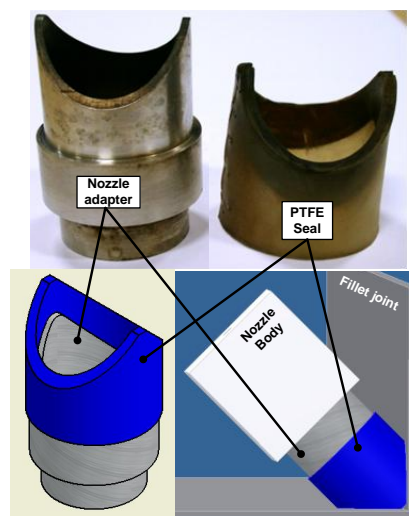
Cryogenic nozzle shroud and silicon seal adapted to fillet welds
